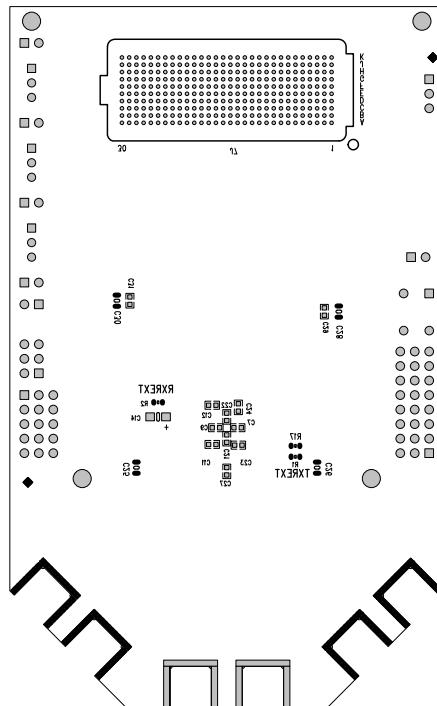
Si5100-EVB Solder Side Assembly (Daughter Card)
